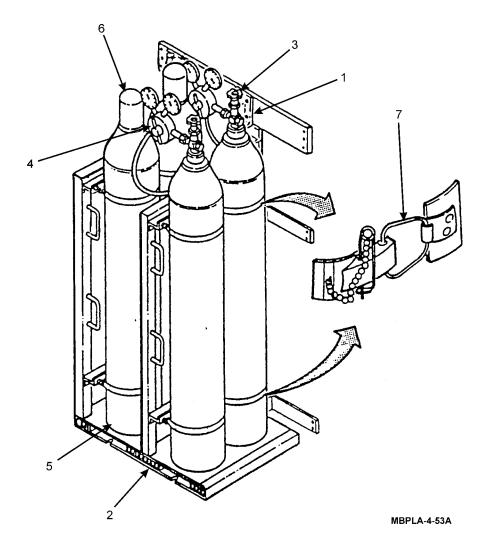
Gas Cylinder and Gas Regulator Valve
